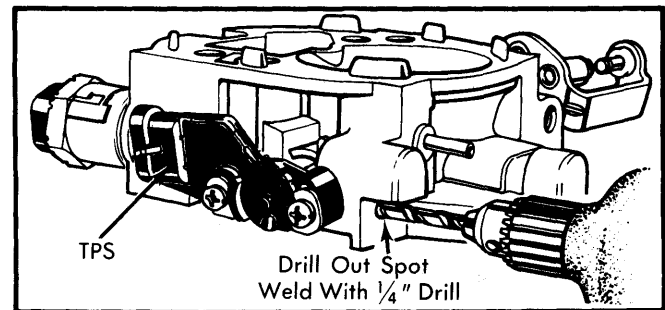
Removing TPS Assembly (Rear Unit Only)
